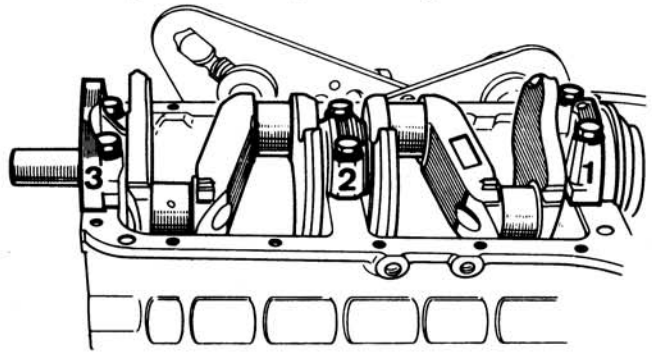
IDENTIFYING MAIN BEARING CAPS
